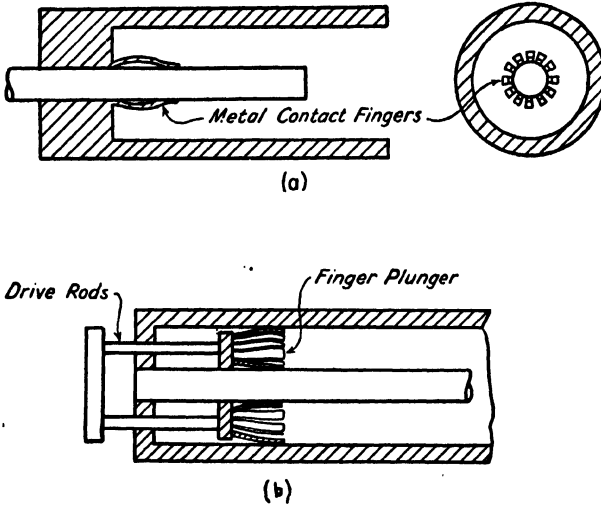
Finger short-circuiting joint: (a) contact to movable center conductor; (b) contact to fixed inner and outer conductors by movable finger plunger.
